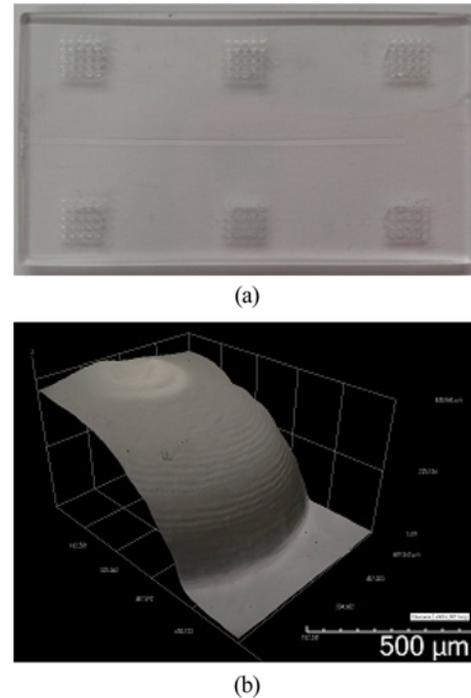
(a) The overall view of the injection molded optical plate and (b) the magnified view of the molded spherical lens pattern
